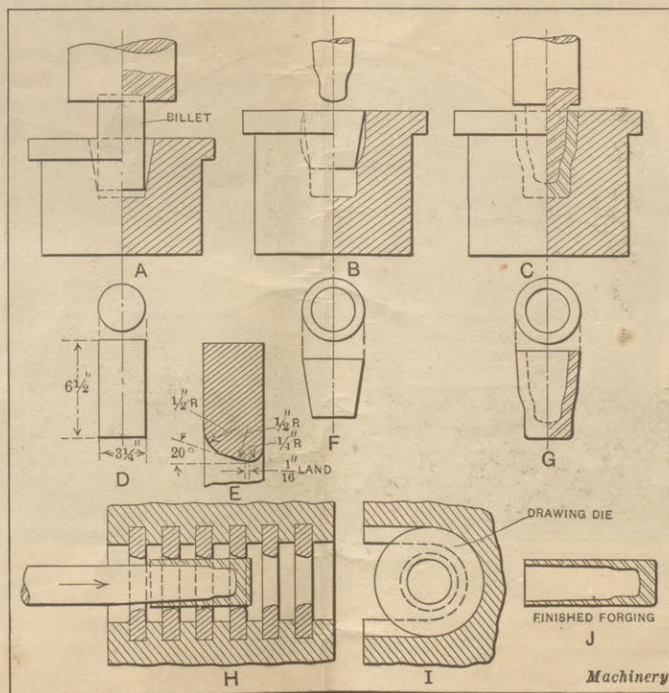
Diagram showing Caley Process of making Shrapnel Forgings in Hydraulic Forging Presses
